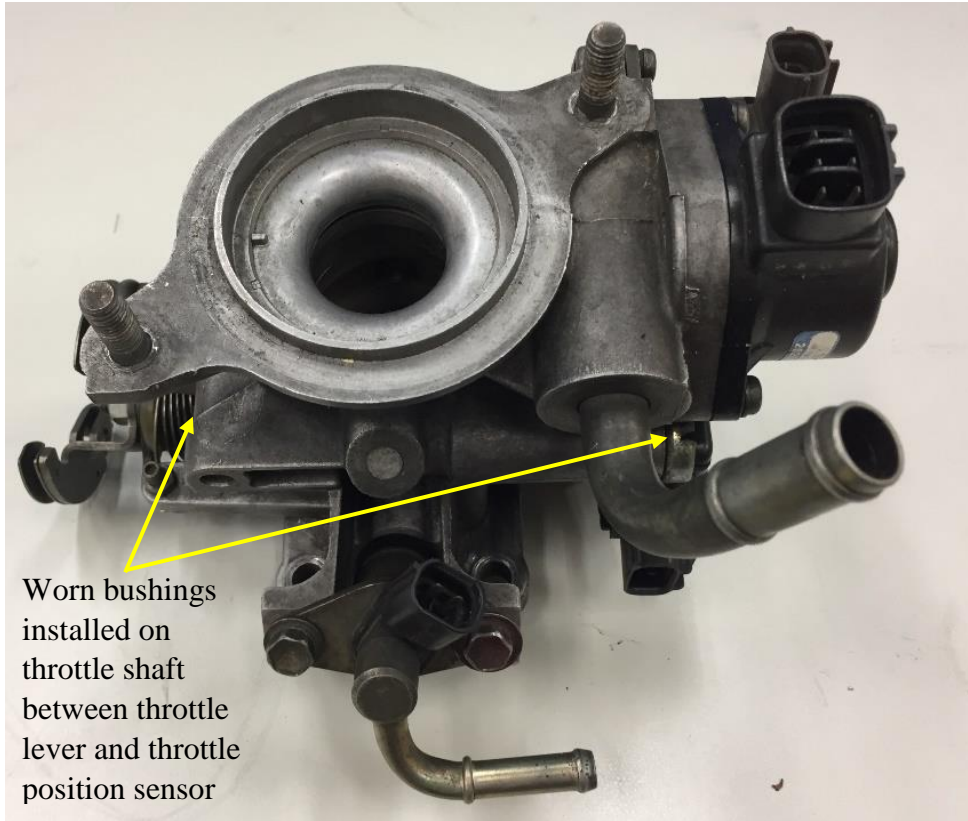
Throttlebody with worn shaft and bushings installed, also with mixture and idle control valves.
